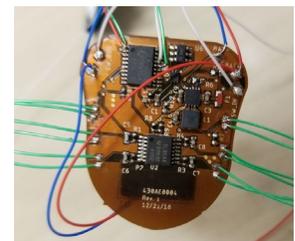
FLEXIBLE CUSTOM CIRCUIT BOARD.
